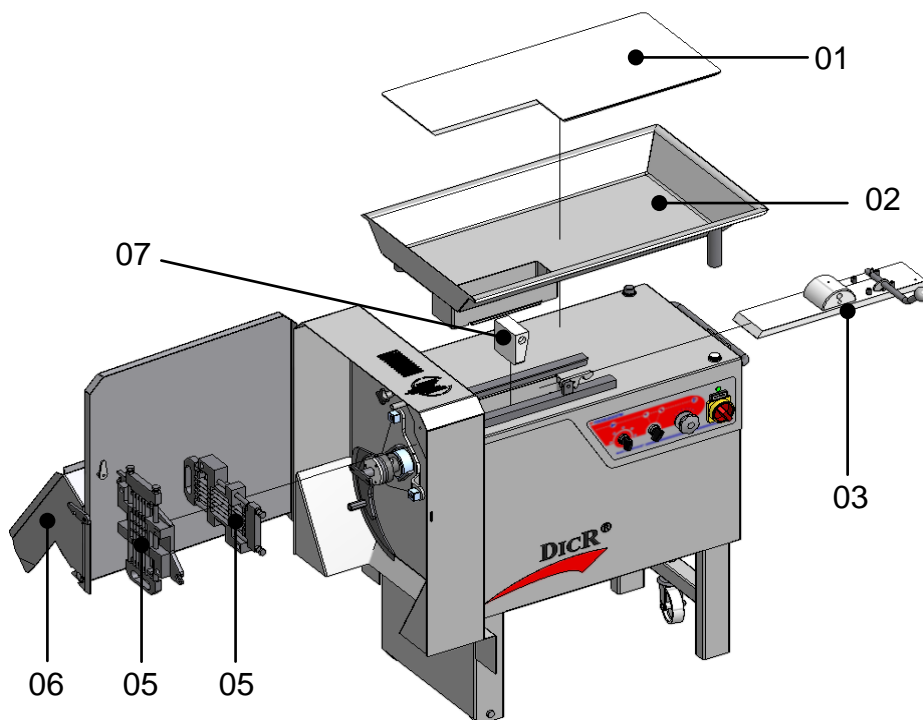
Removal and assembly of carving board, closure slider and piston plate
